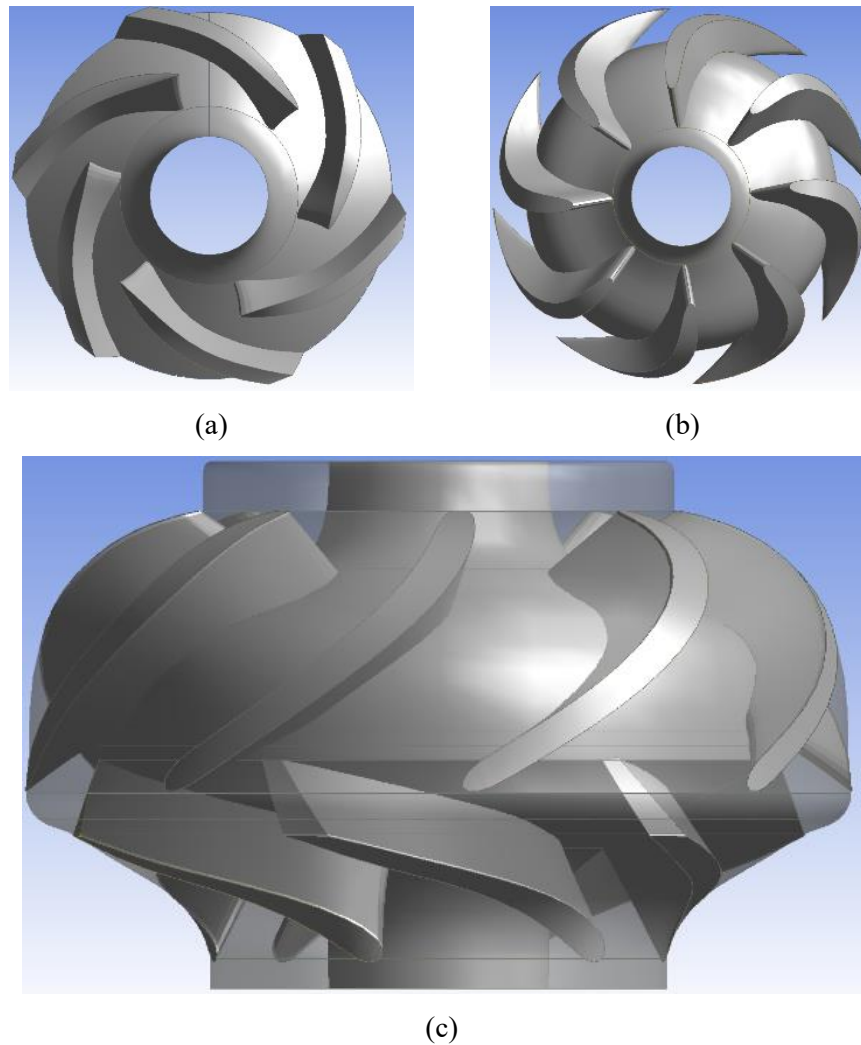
Geometries of a single stage DN-1750, (a) impeller blades, (b) diffuser partitions, (c) entire 3D assembly
